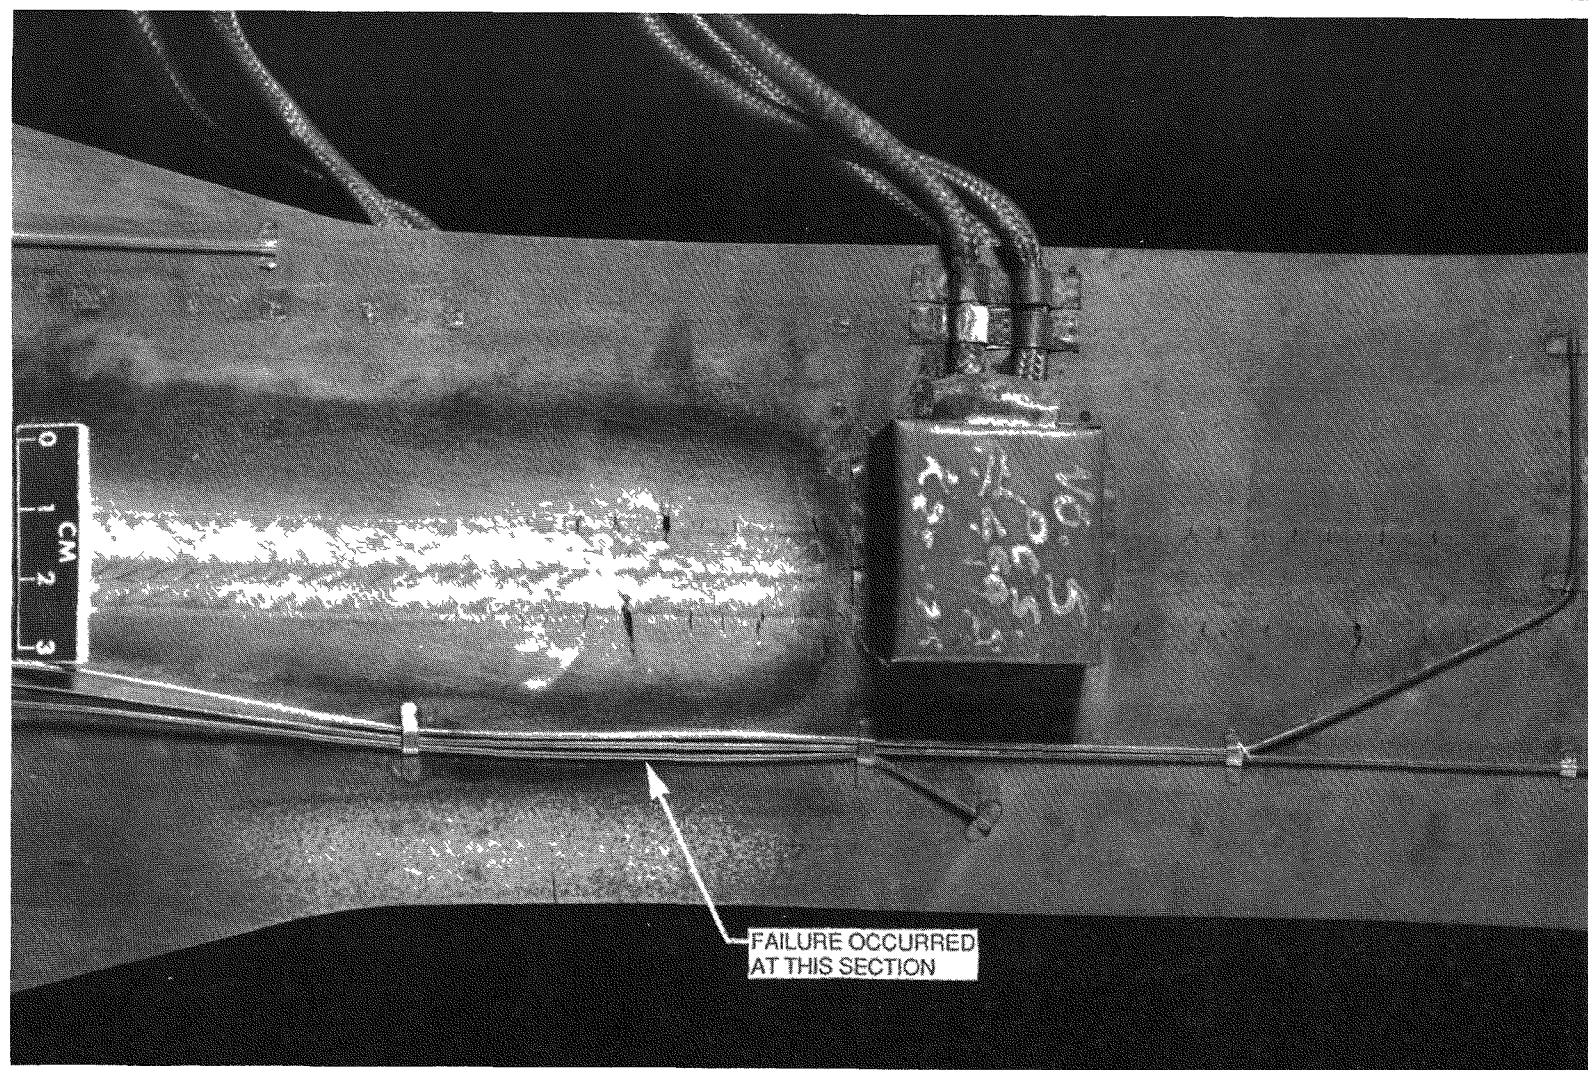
Surface of plate weldment specimen WPCT-5 after 6965 h of testing.
